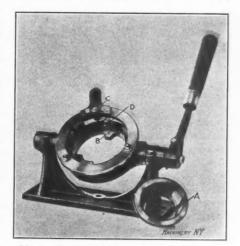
Fixture of which the Casting shown in Fig. 1 forms a Part
